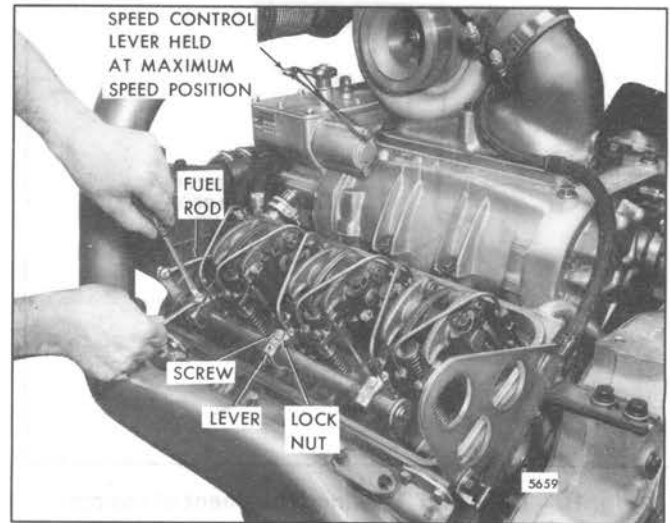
Position No. 1 Injector Rack Control Lever (One Screw and Locknut Assembly)
